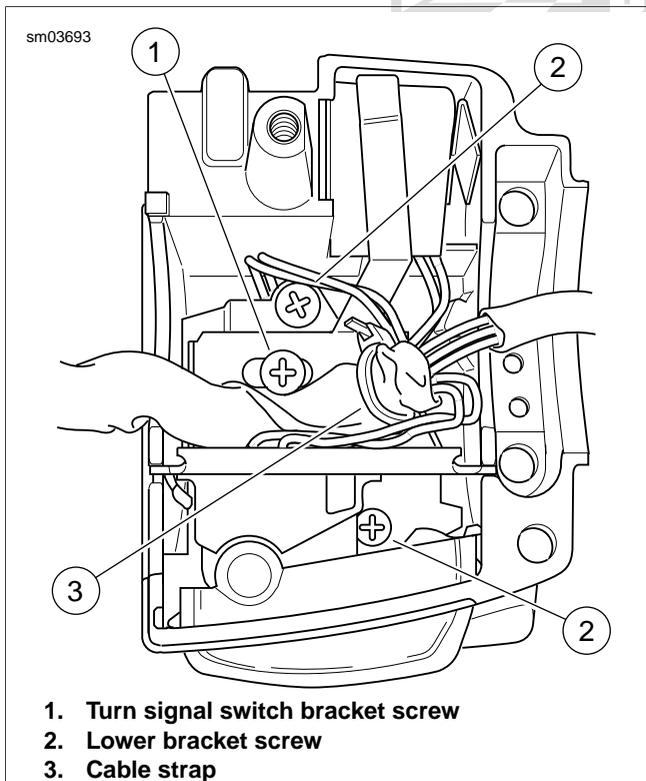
Lower Right Handlebar Switch Housing (Without Splices) - Classic/Ultra Models
